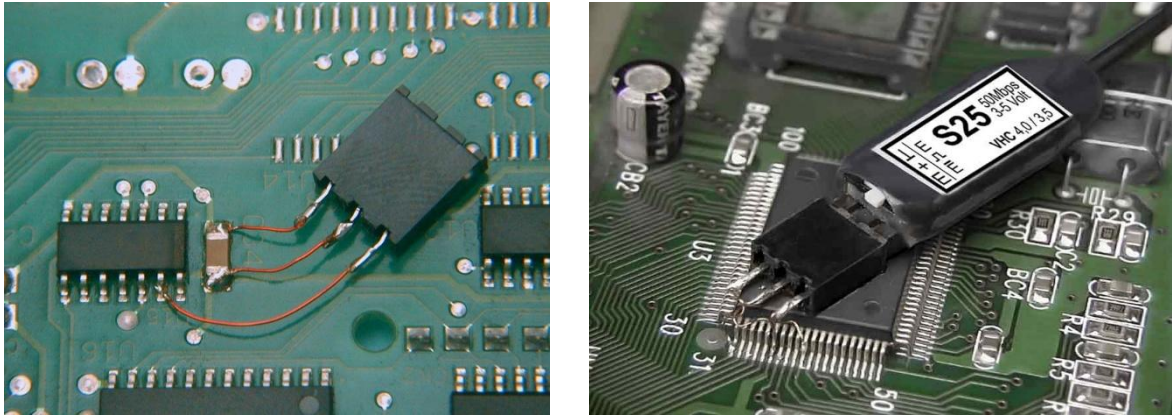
A socket where the S25 sensor can be connected is placed on a PCB
